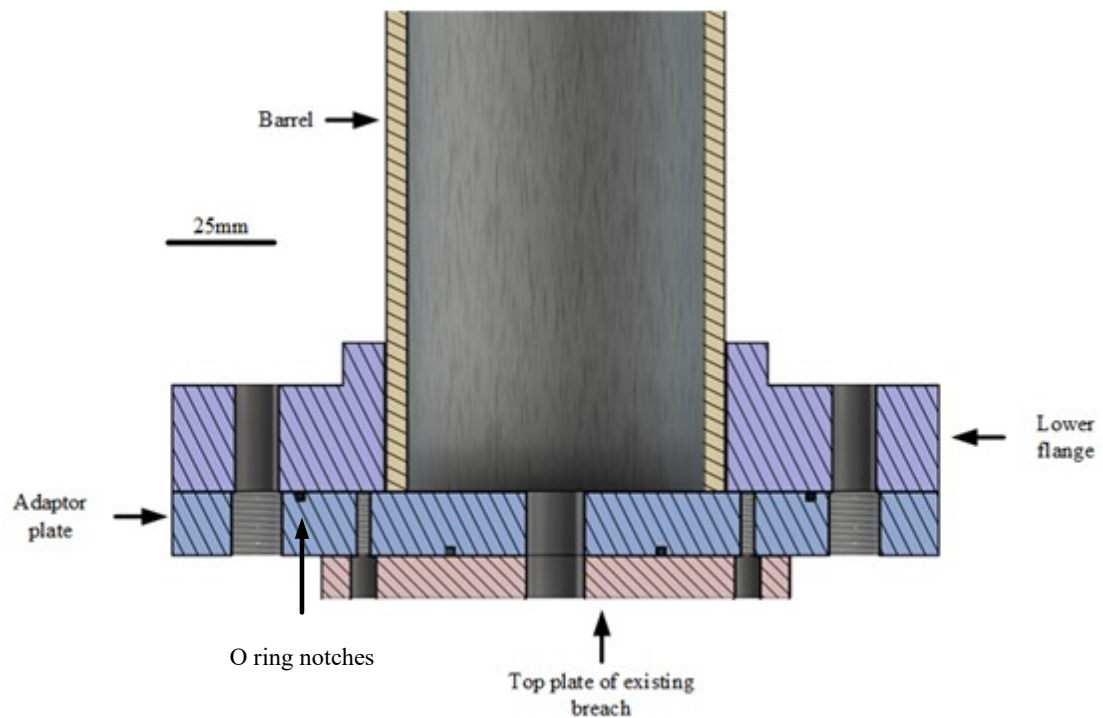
Cross section CAD view through the centre of the lower aspect of the RivUL showing relative position of the barrel, flange, adaptor plate, and existing breach inlet. O-ring notches are seen in the adaptor plate. Fixing bolts (m12 and m8) are not shown.
